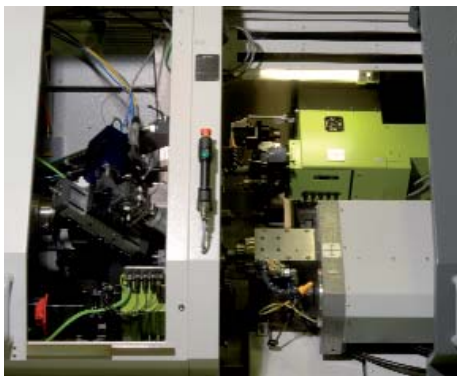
Benziger turning machine with integrated laser optics in the drive chamber (left)
